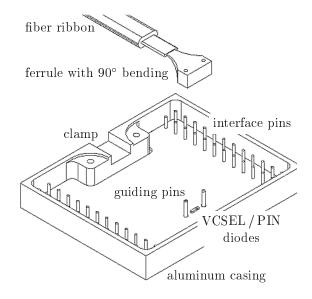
Exploded view of the aluminum casing. Between two guiding pins for the ferrule (enclosing the 90° fiber deflection) are the aligned sixfold VCSEL and twofold PIN diode arrays.
